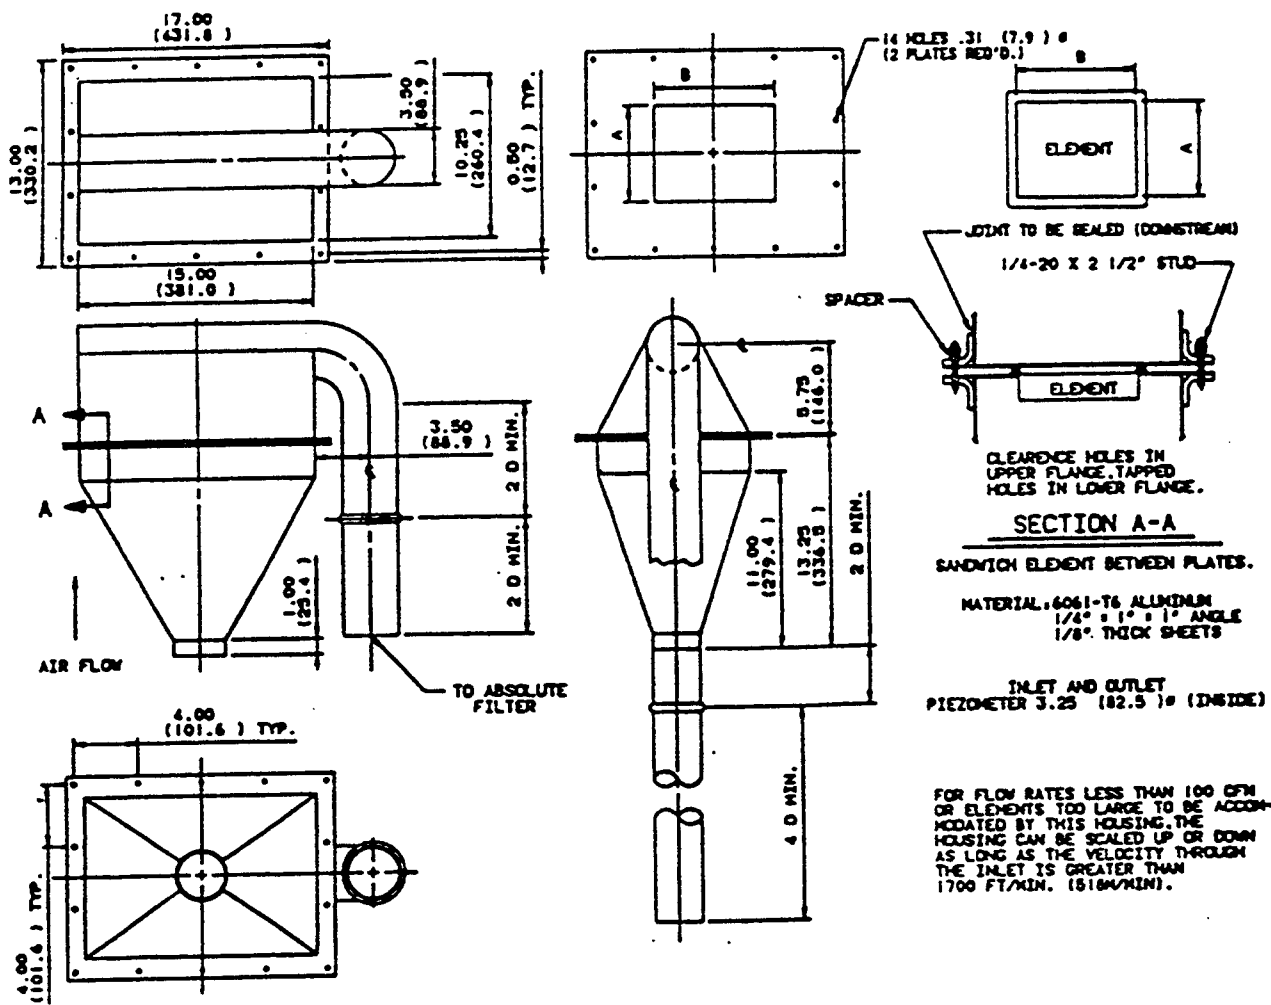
SAE (1987b) J726 Panel Filter Universal Test Housing
